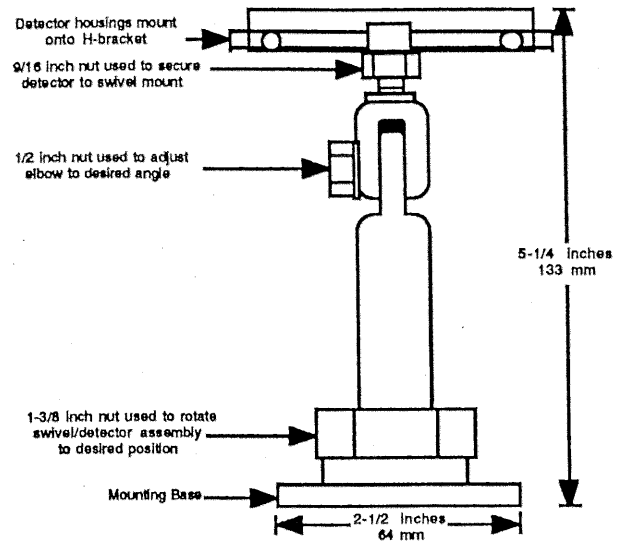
Q9001K Swivel Mounting Bracket (replaces Q9001D)
